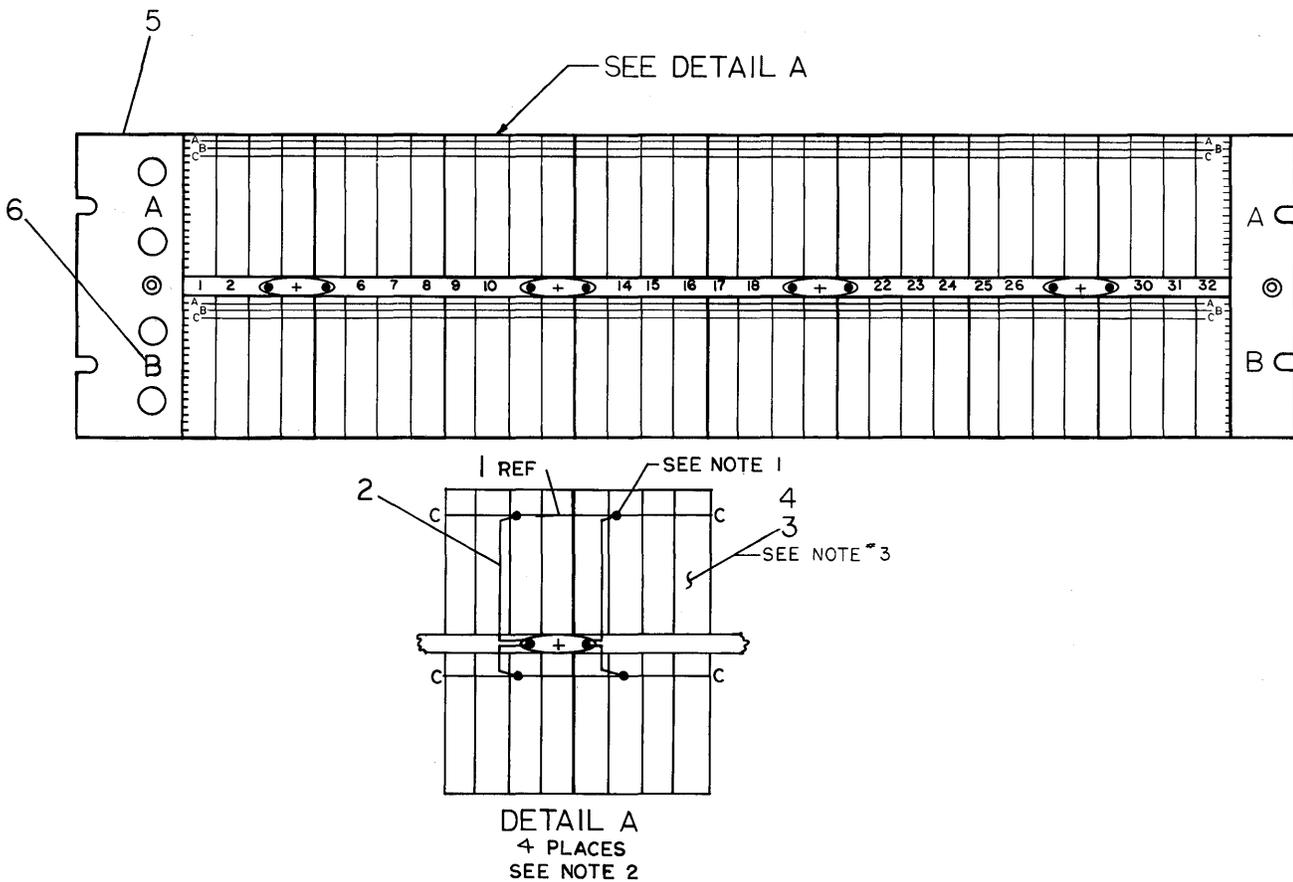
C-AD-7005956-0-0 A17 Assembly Wiring Diagram
